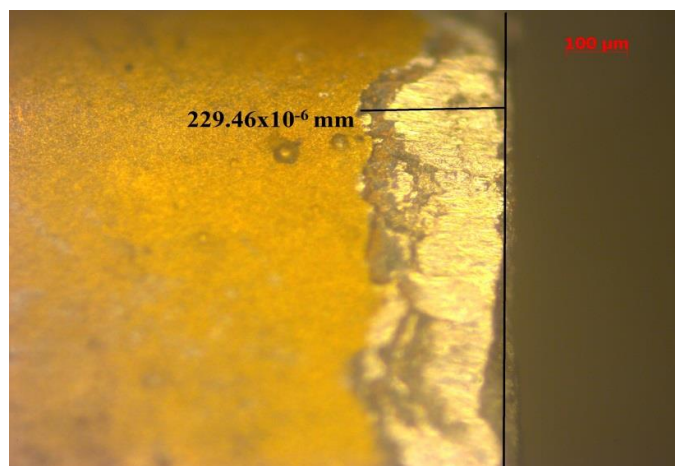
(b) Flank wear for CVD coated tool for spindle Speed 600 RPM, depth of cut 0.4 mm, feed rate 0.12 mm/rev
